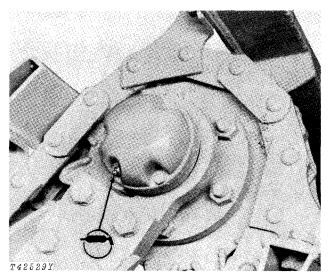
Upper Elevator Cross-Shaft Bearing (1 point)
